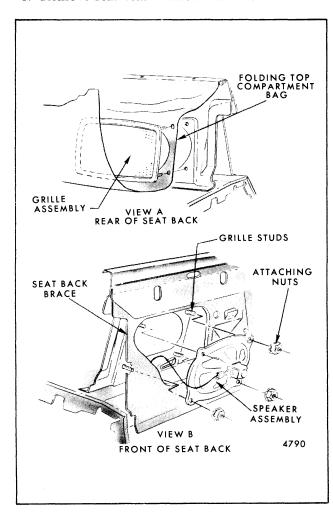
Rear Seat Speaker Installation - "67" Styles
